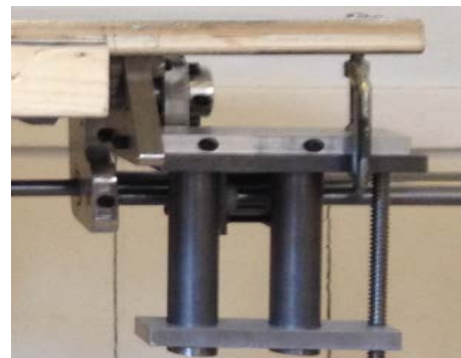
Raising and Lowering Table Saw Blade Mechanism
